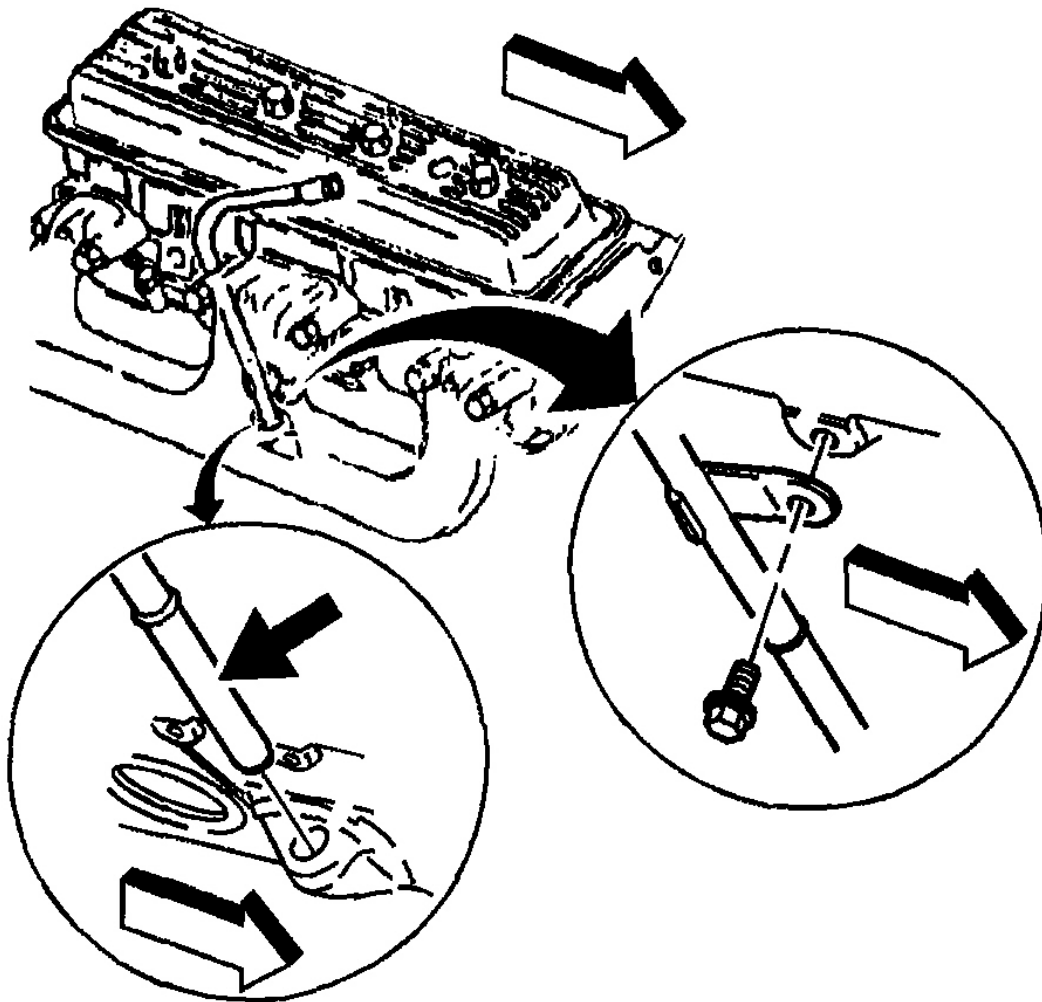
Removing Top Half Of Oil Level Indicator Tube From Bottom Half
